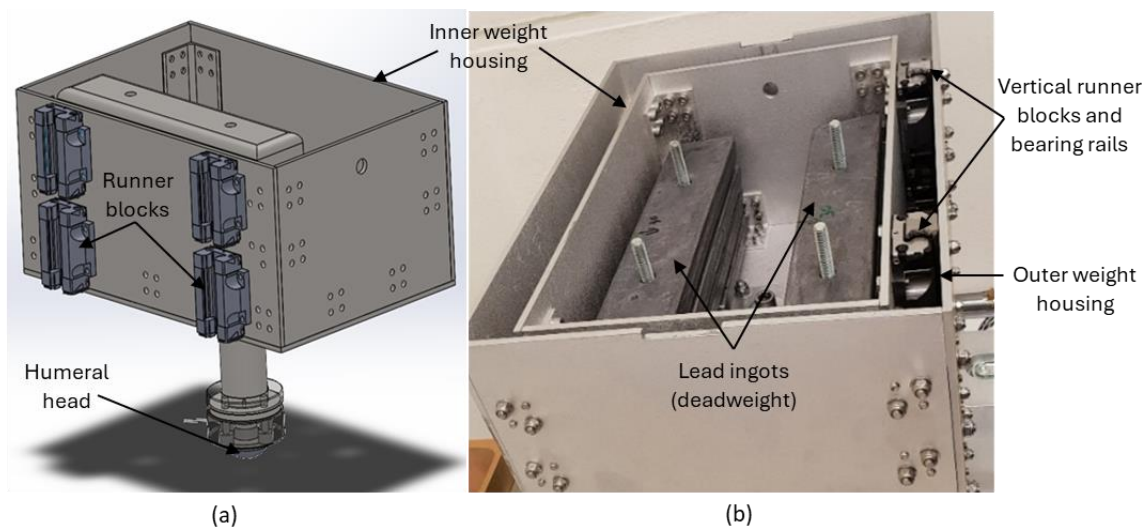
Inner weight housing assembly (a) detail, showing the mounting of the runner blocks and the attachment of the HH assembly, and (b) assembled into the outer weight housing, with lead deadweight added.
